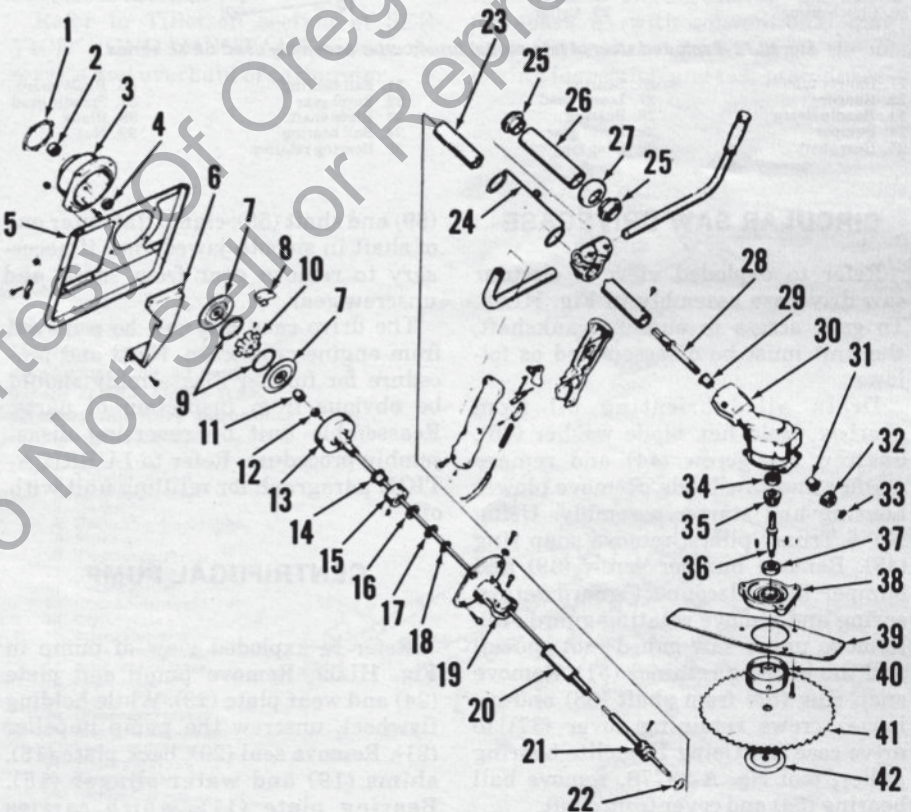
Exploded view of early type brushcutter assembly. Refer to Fig. HL72 for later brushcutter.
